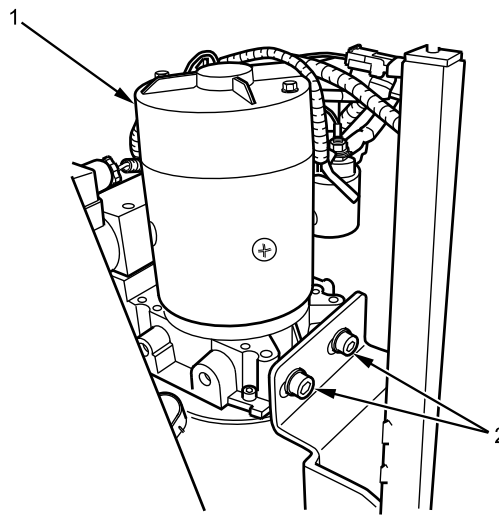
Rear Door/Ramp Hydraulic Pump Mounting Bolts.
